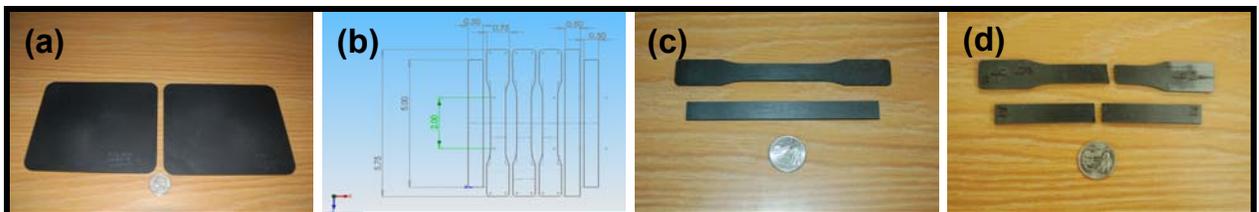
(a) BMCI fabricated BMC panels, (b) CAD drawing, (c) waterjet cut test bars, (d) fractured test bars
